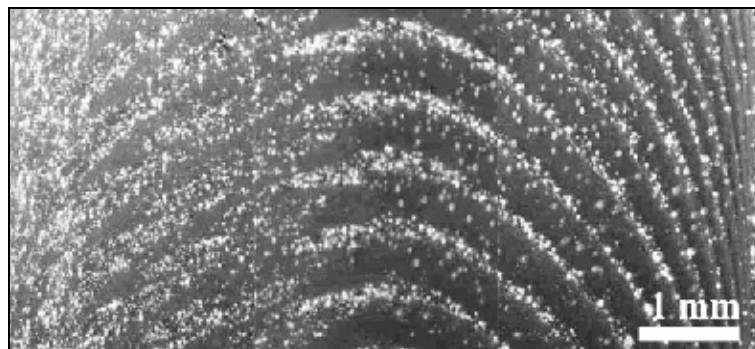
Segregation of the intermetallic particles in bands on the weld crown of AA2024-T351 weld, welded at 200 mm/min and 360 rpm [76]
